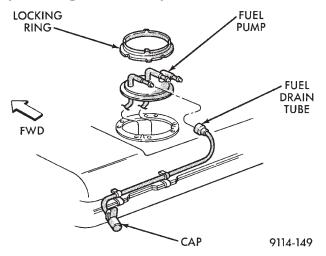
Fuel Drain Tube—Front Wheel Drive
